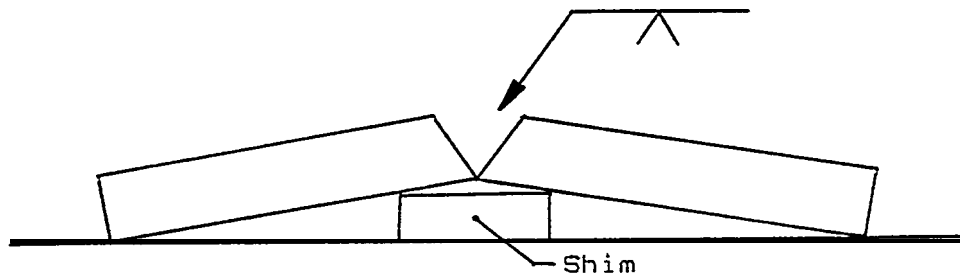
Presetting of plates to offset the angular distortion of a butt weld
